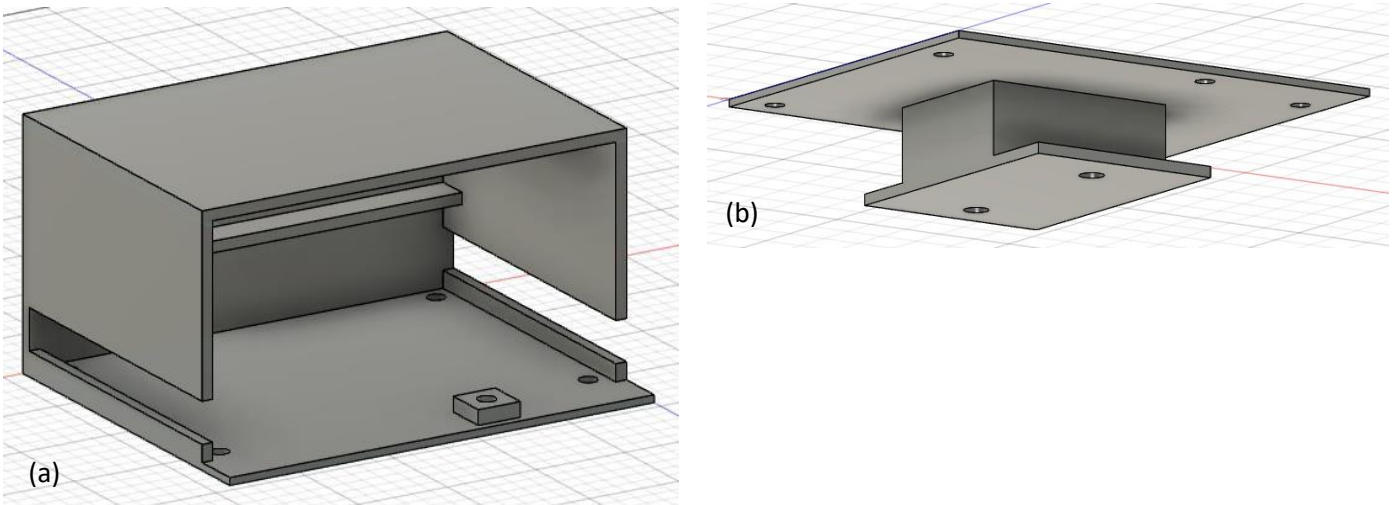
Split parts of Shielded Enclosure 3D design. (a) Top part. (b) Bottom part.
